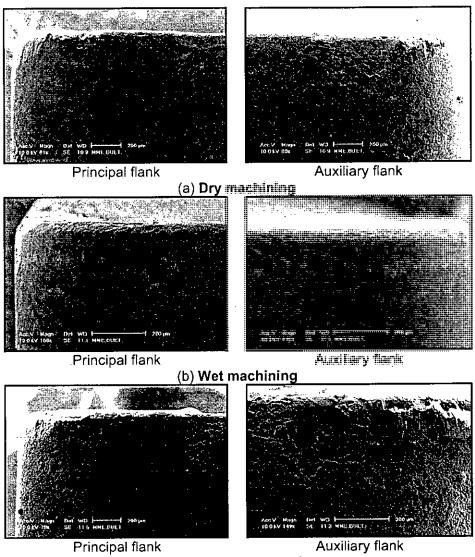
SEM views of worn out tip of SNMM insert after machining steel under (a) dry, (b) wet and (c) cryogenic condition after 50 min of machining.
